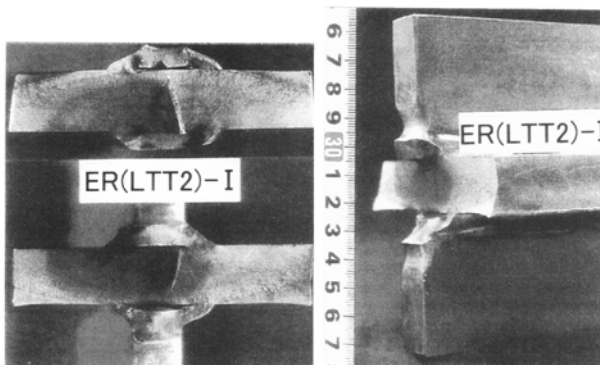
Fracture surface and pass after fatigue test (Type ER (LTT2),  $150 \text{ N/mm}^2$ ,  $1.33 \times 10^6$  cycles)
